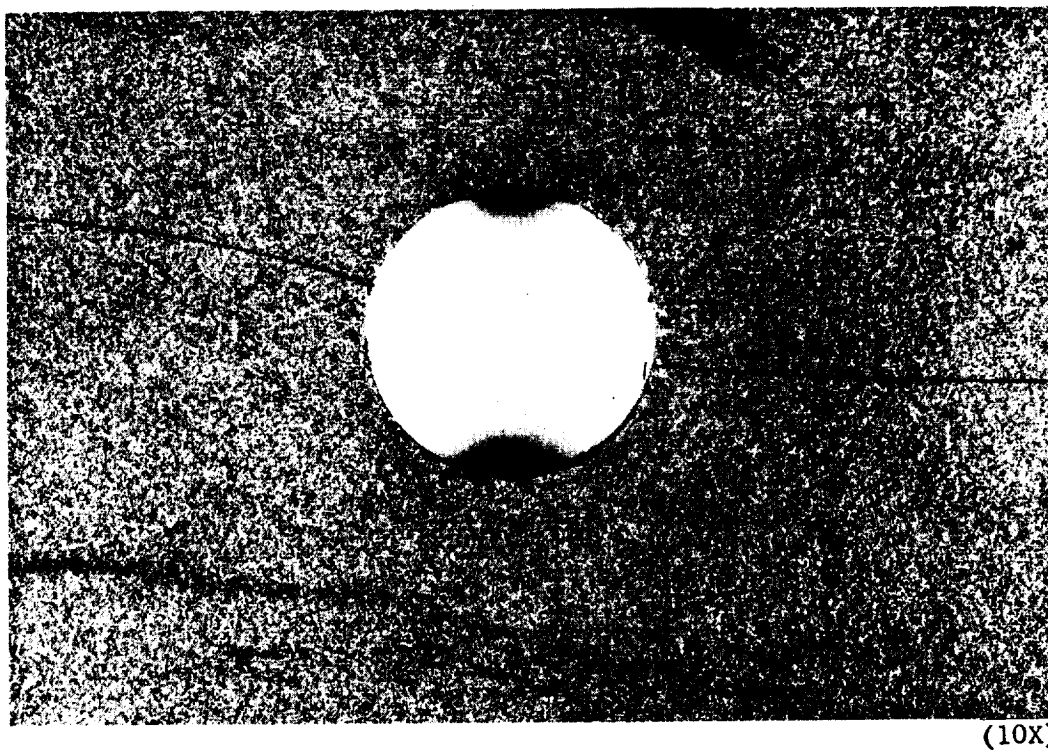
HOLE DRILLED WITH DULL DRILL SHOWING RADIAL CRACKING (UNETCHED)
